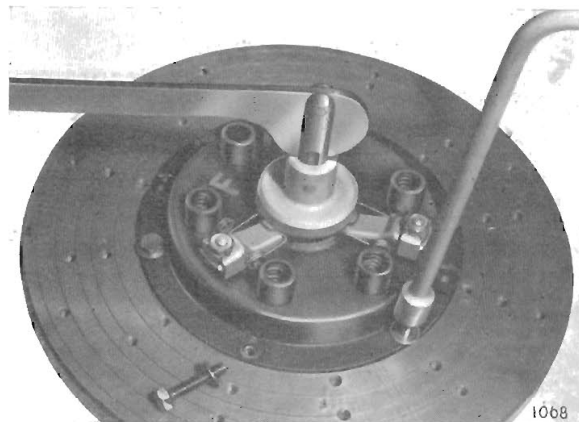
Attaching clutch unit to Churchill fixture (Herald and Spitfire).
